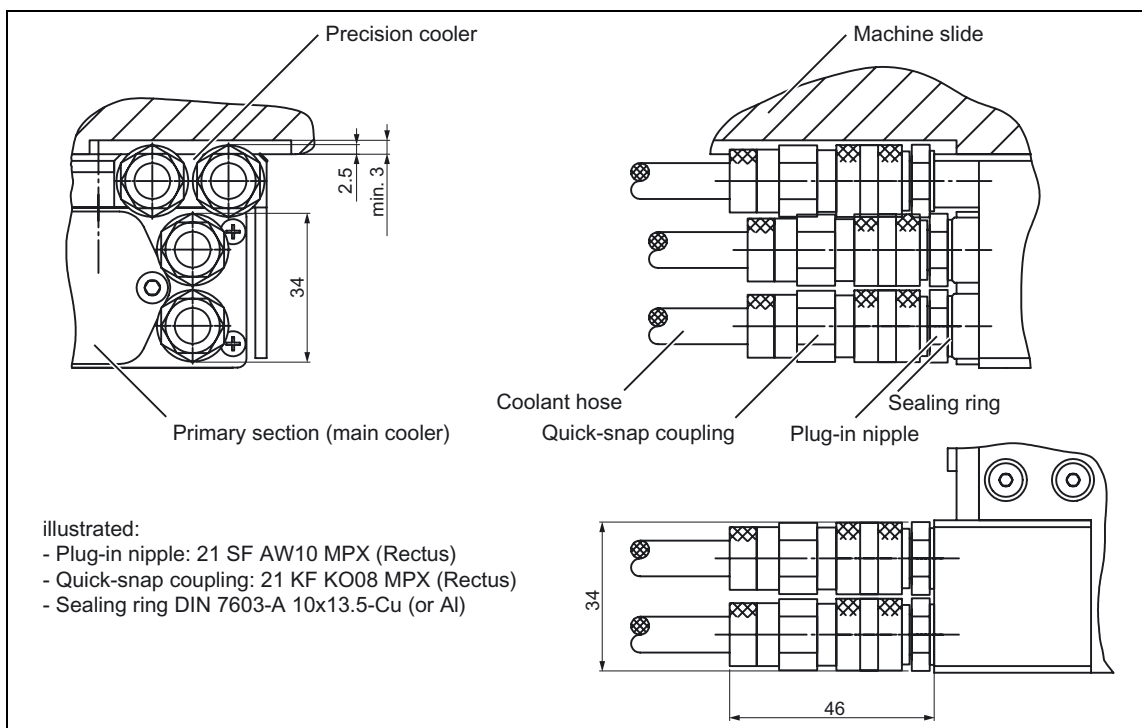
Example of a cooling connection with a chase on the machine slide
